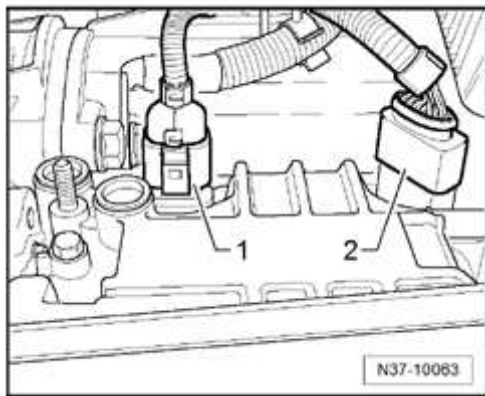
Identifying 8-Pin G68 and 14-Pin G93 Electrical Harness Connectors
